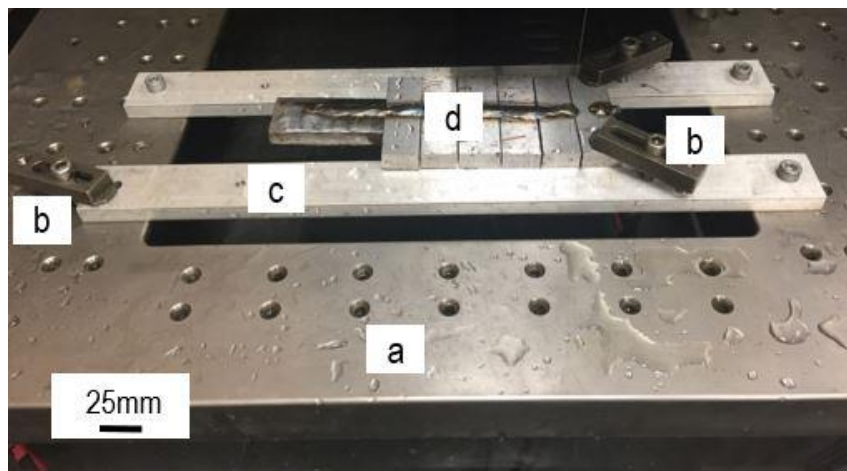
Fixtures for EDM sectioning. (a) EDM table, (b) Clamps, (c) Supporting beam, (d) Welded workpieces
